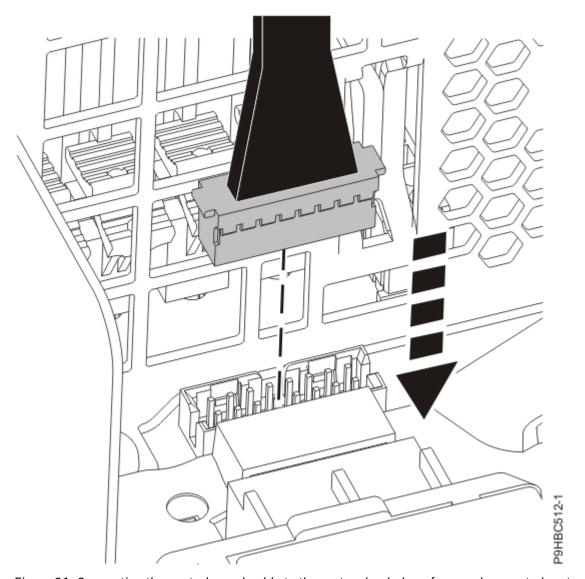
Connecting the control panel cable to the system backplane for a rack-mounted system
